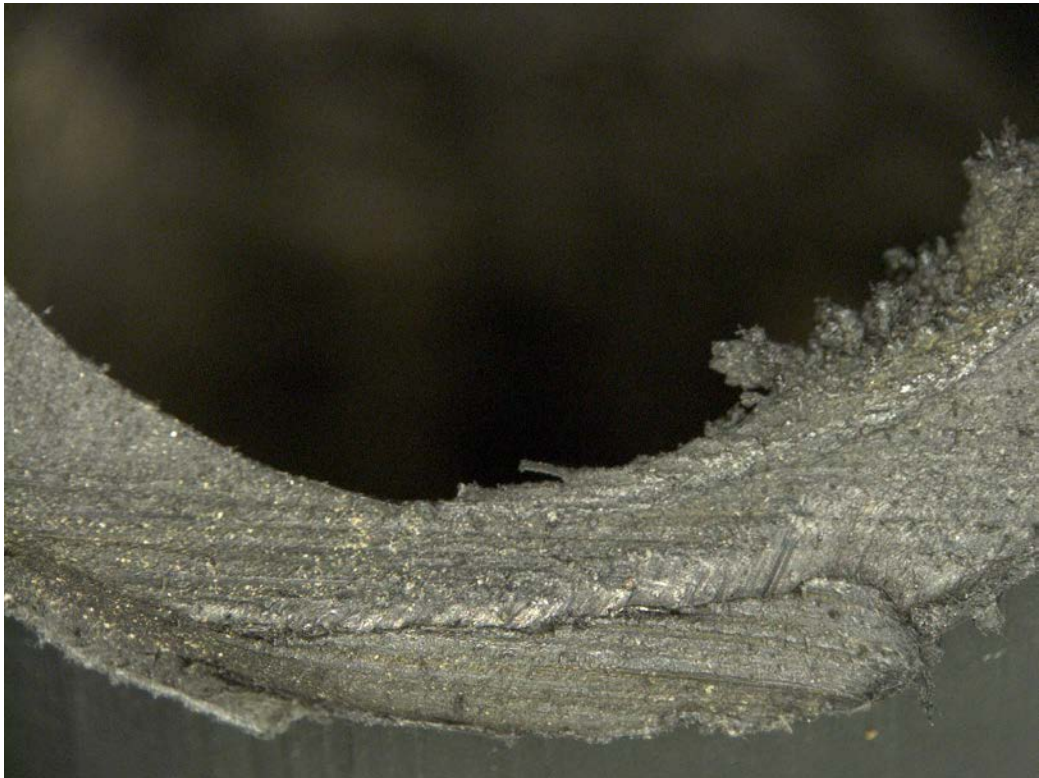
Closer view (20X) of the cut surface showing the bottom area figure 3b.
